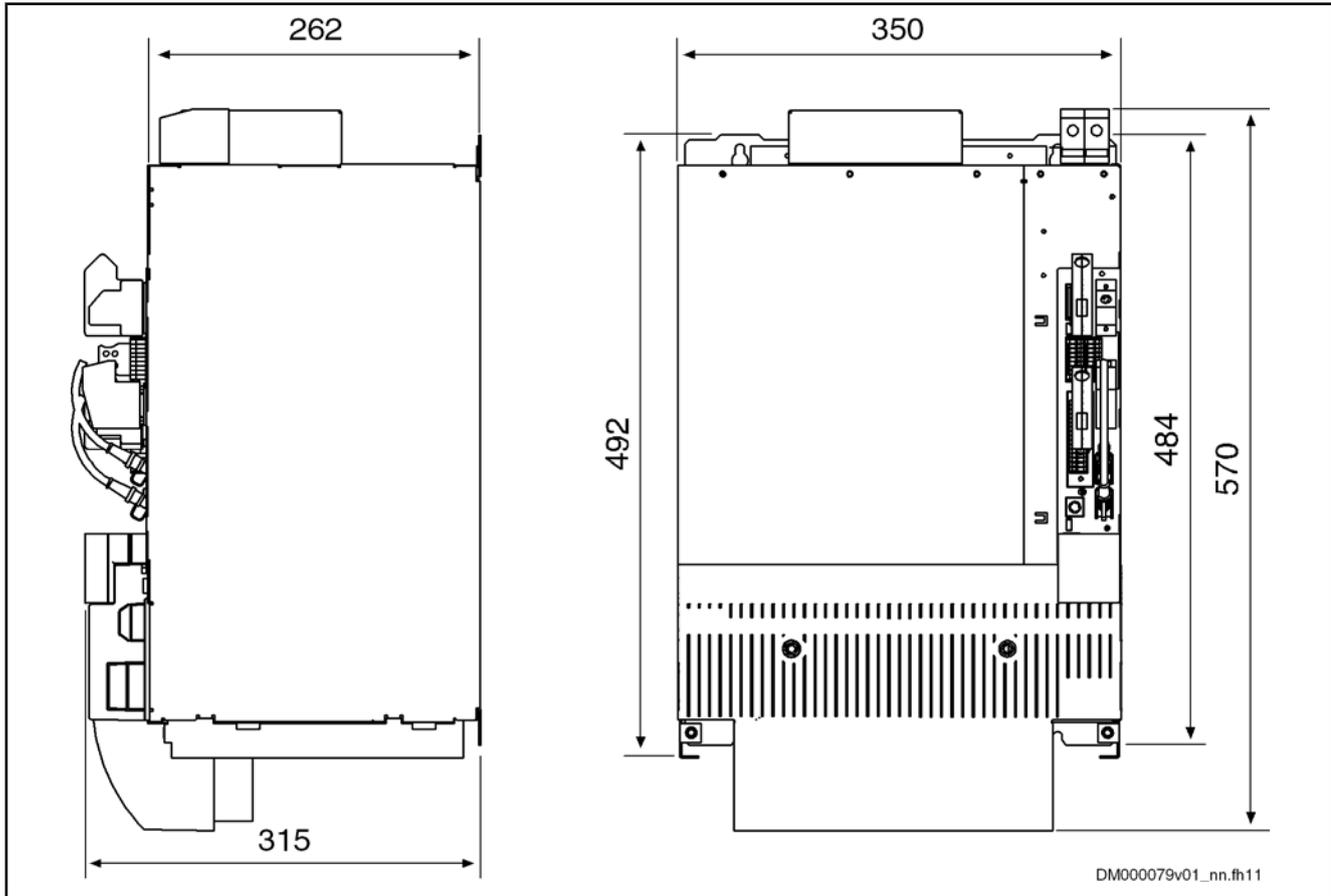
Dimensional drawing HCS03.1E-W0210
